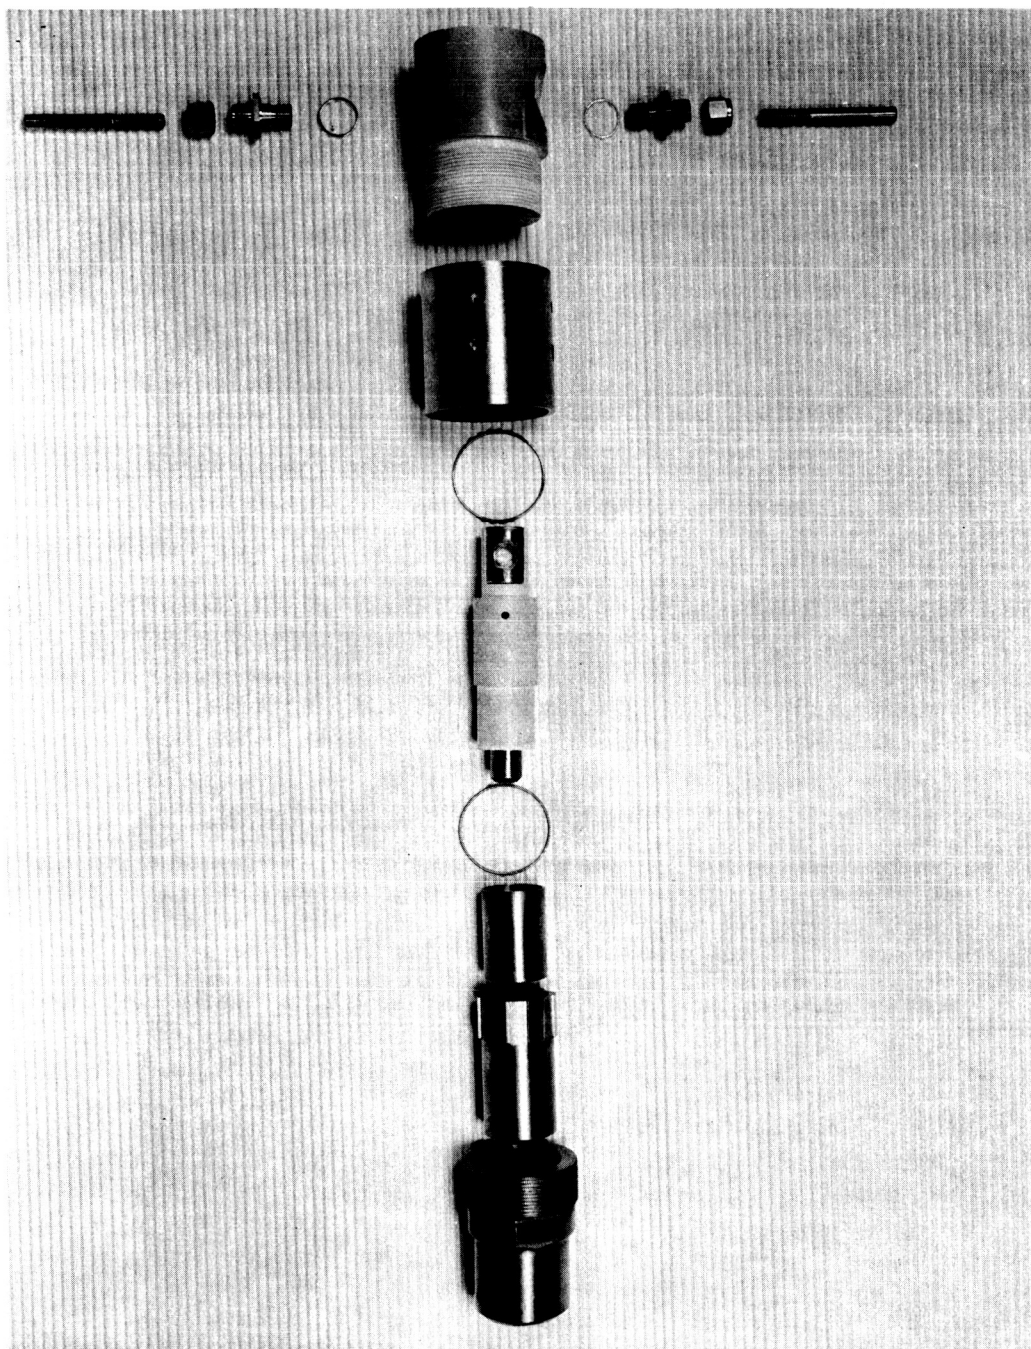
30 KW Three-Phase Plasma Arc Jet Engine (Y16-2) Exploded View
